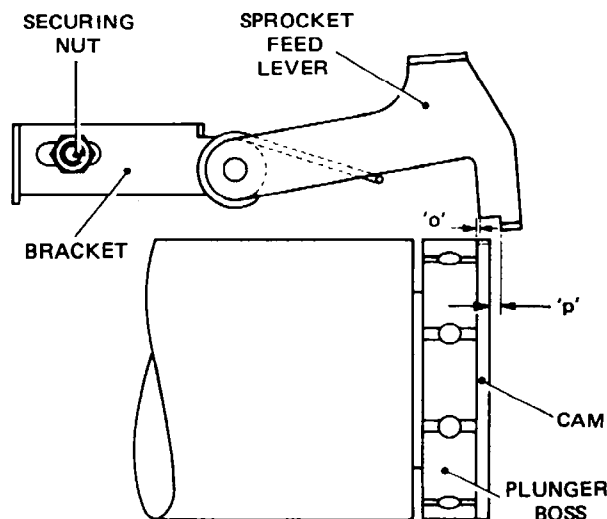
SPROCKET-FEED LEVER MECHANISM (REAR VIEW)
